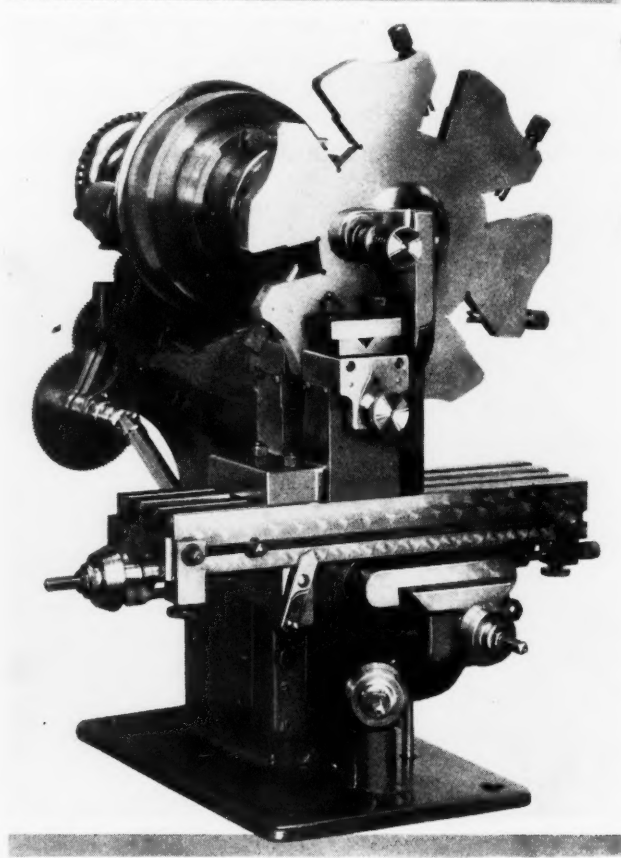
Equipment for Making Accurate Cubes on a Hardinge Bros. Bench Milling Machine—an Unusual Job for a Milling Machine
